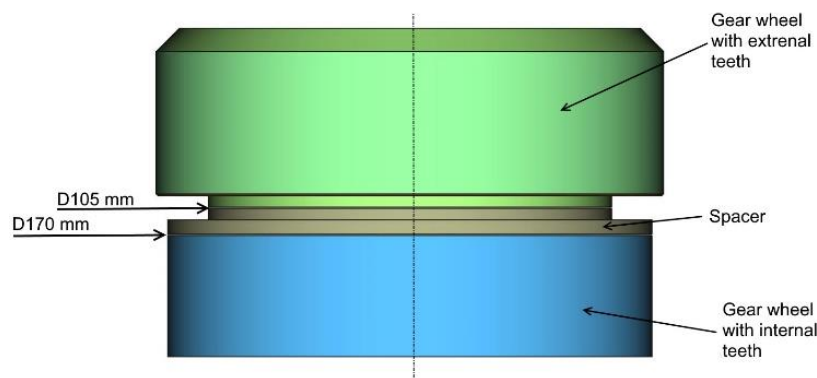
Design of weldment and weld position and orientation of electron beam and placement of thermocouple during pre-heat process
